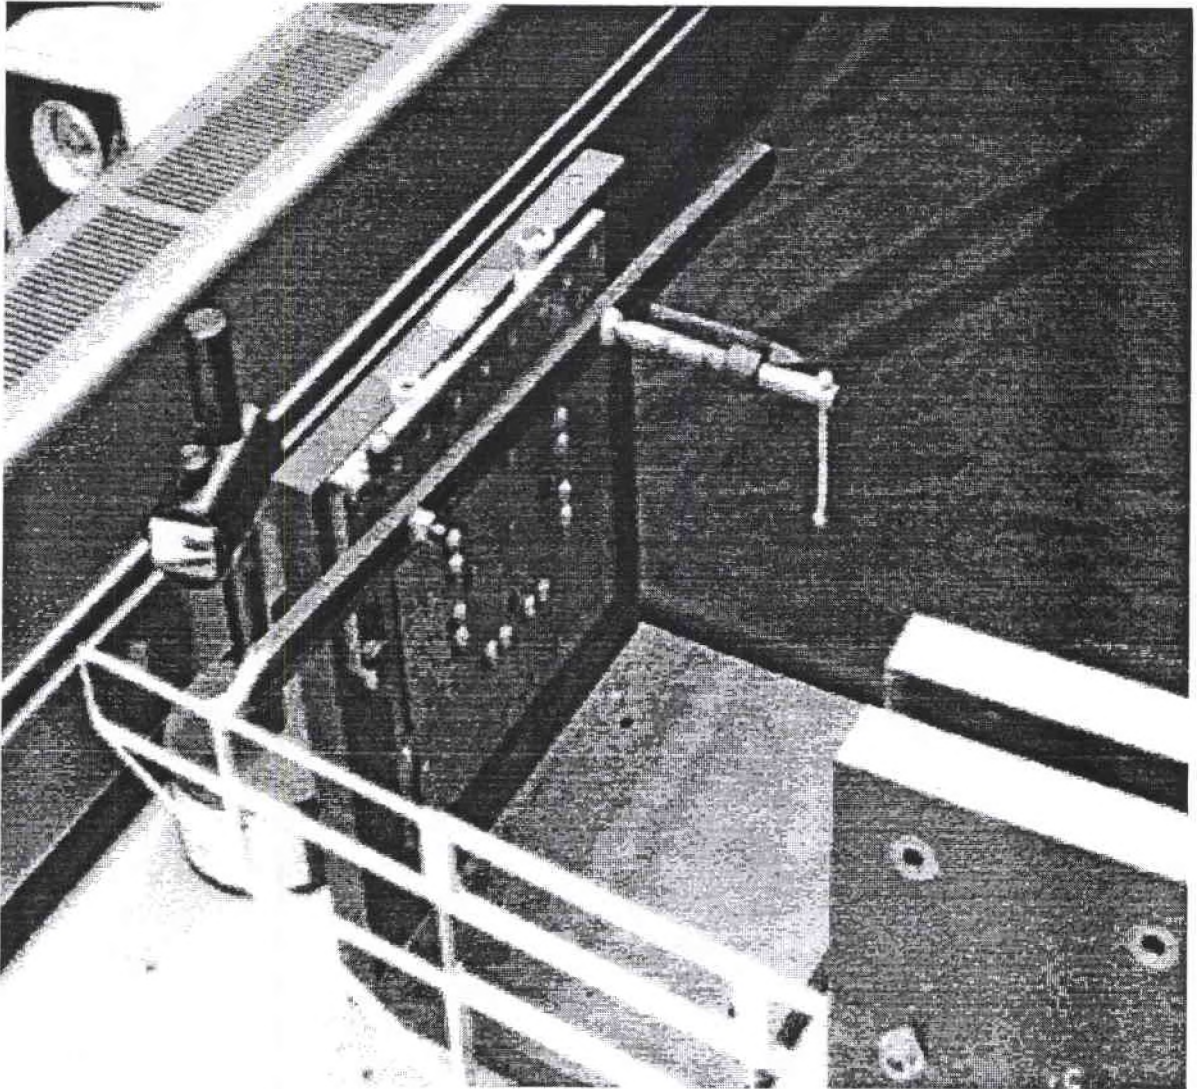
Test Structure in Mounting Fixture With Probe Assembly
